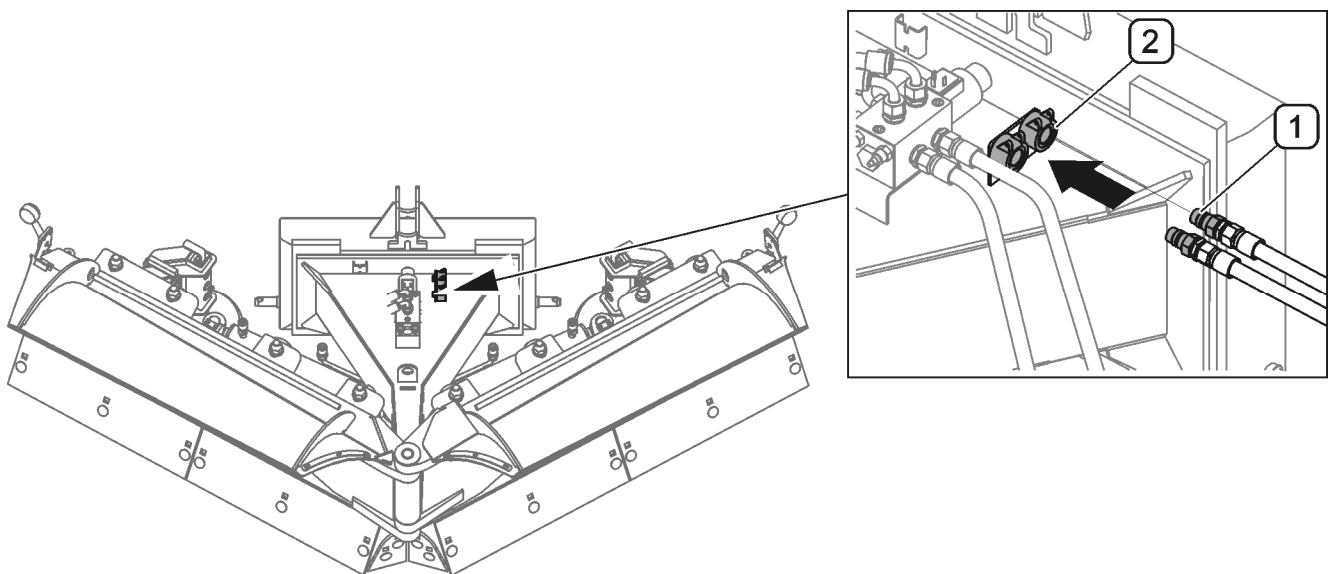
Protection of hydraulic conduit quick couplers
